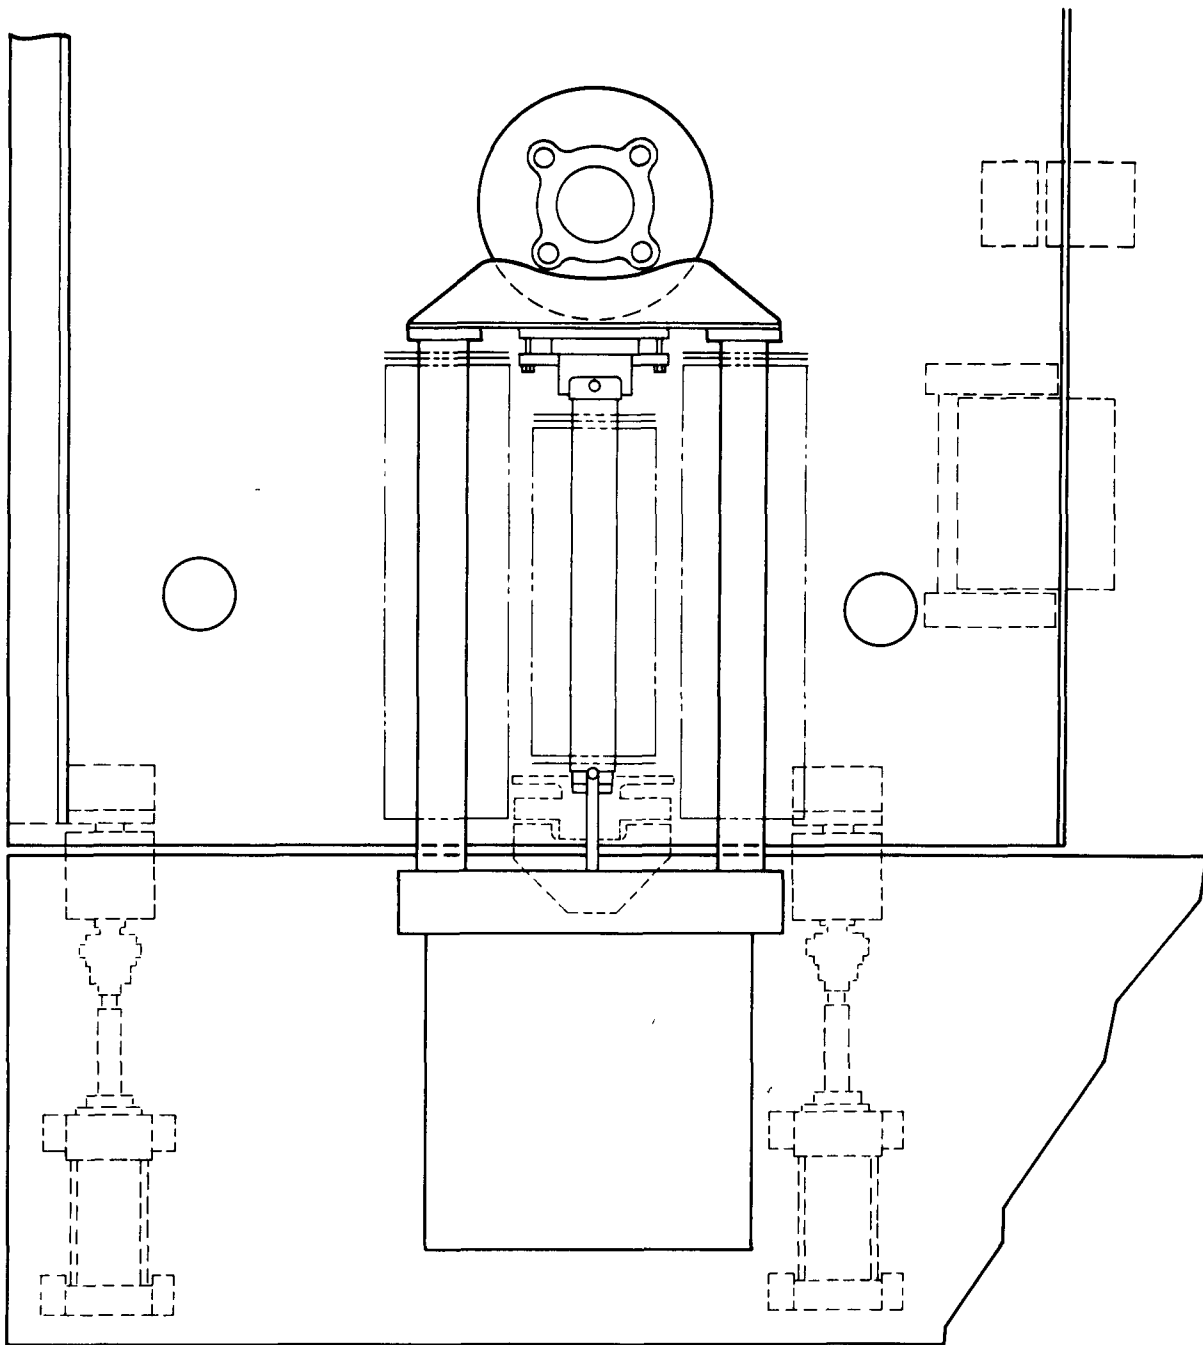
Variable position knife gate valve to be used in primary burner product removal system
